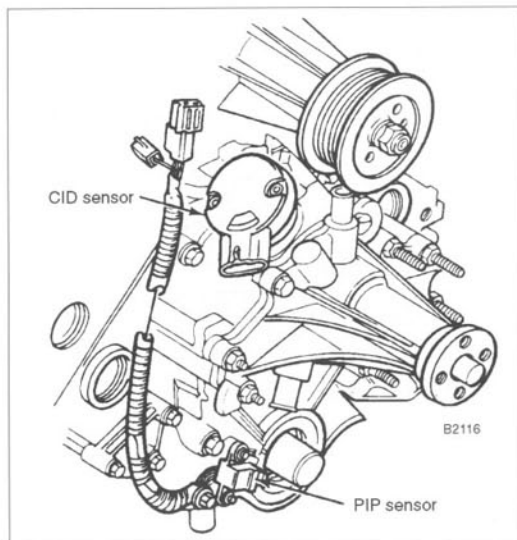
3.8L SC V-6 engine drives PIP Sensor directly off crankshaft. CID (Cylinder Identification sensor) is driven by camshaft through bevel gears in distributor location. On 3.0 and 3.2 SHO engines, CID is driven directly off of rear camshaft.
